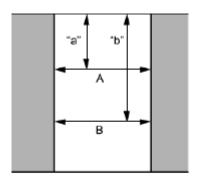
Checking Cylinder Bore Diameter Courtesy of SUZUKI OF AMERICA CORP.
